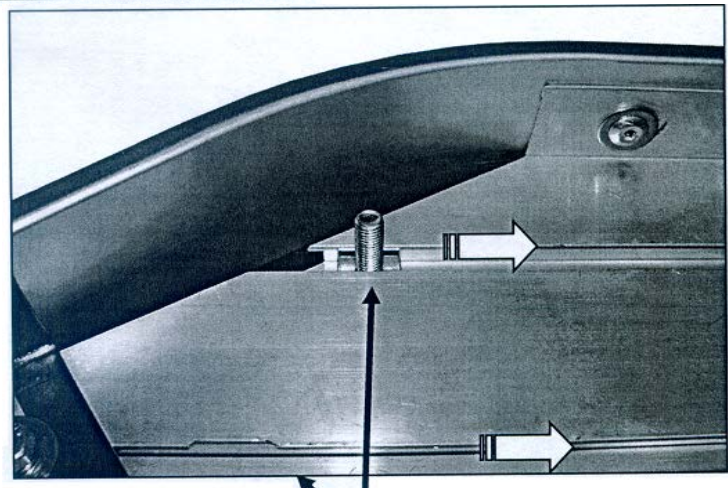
Thread Plastic Washers onto all mounting studs. Passenger side rear mounting location pictured
